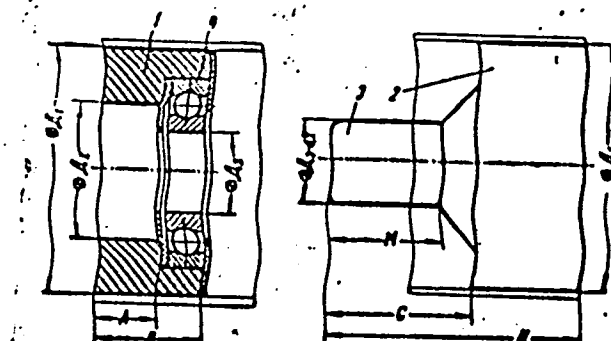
Device for friction welding of thin-wall pipes.
